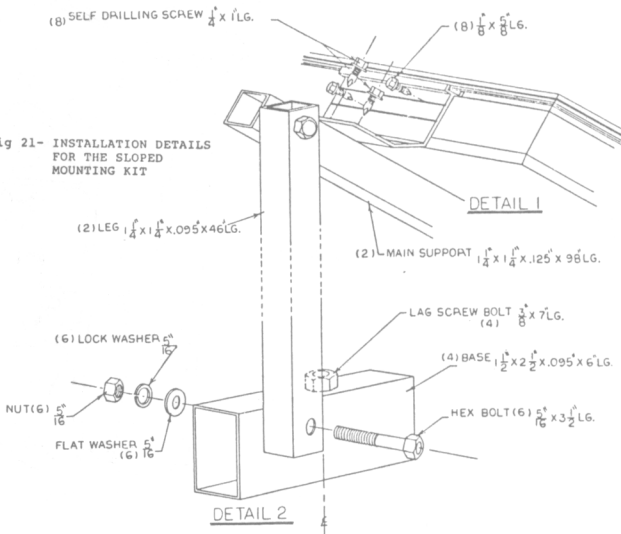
INSTALLATION DETAILS FOR THE SLOPED MOUNTING KIT
